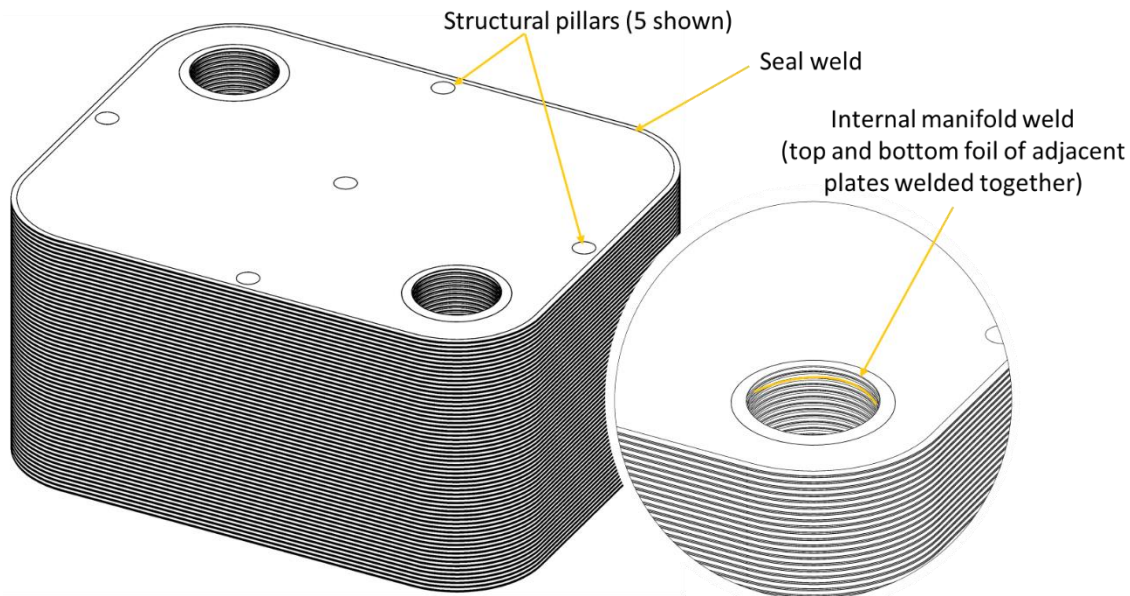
The key features of the AW-TFHX are the internal manifold seal welds and the structural frame welds. The perimeter seal weld and pattern welds remain the same.
